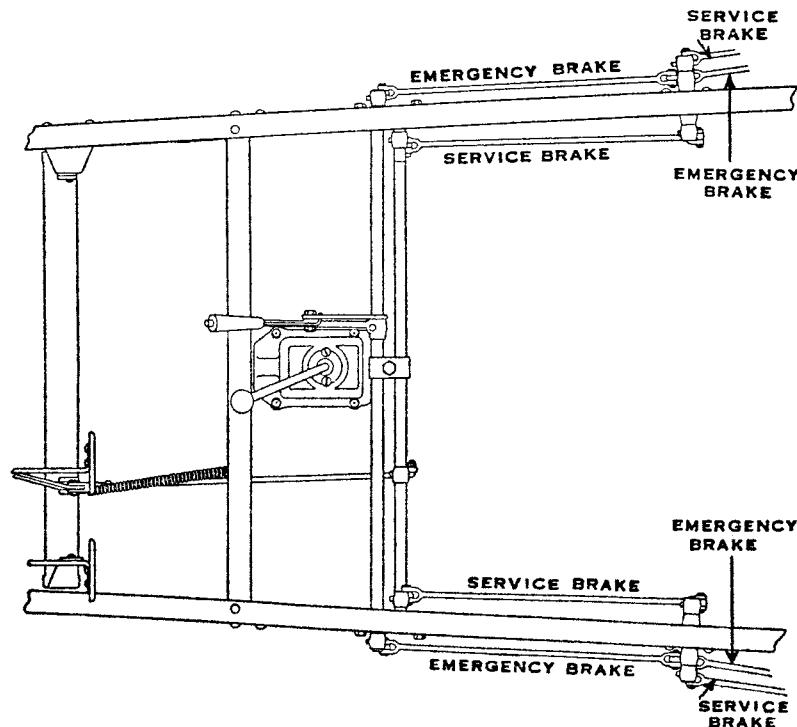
Brake Controls (Two Wheel Band Type Brakes)
